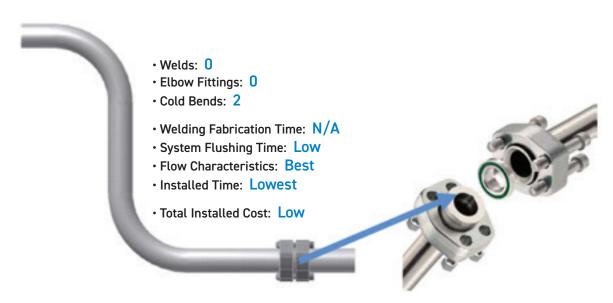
Cold bent non-welded piping system with Parflange F37 connection
